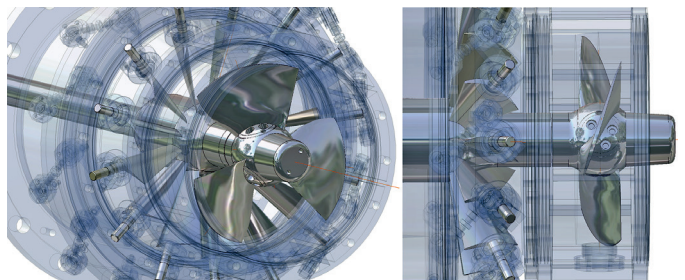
Views of the runner blade wheel of the Kaplan hydraulic turbine model
